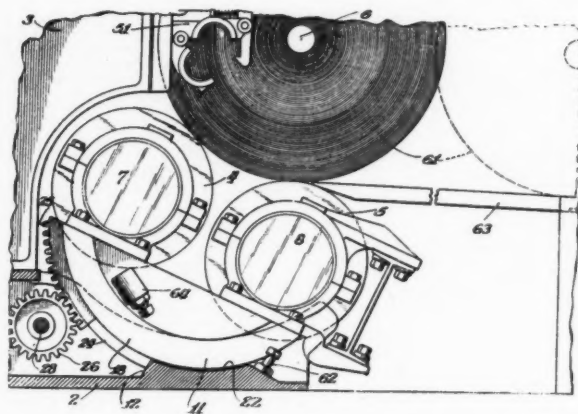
Tilting of drums 4 and 5 effects the removal of roll of paper from machine
